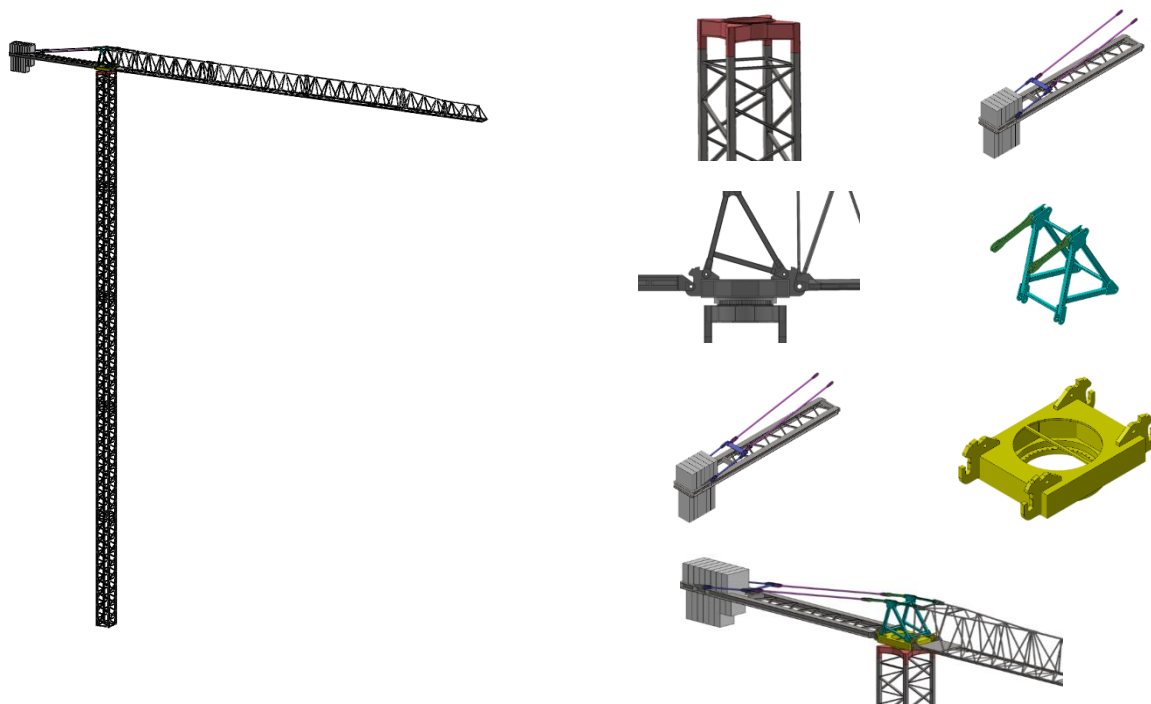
| CAD 3D model (Solid Works®) of the tower crane and its several parts in detail.
